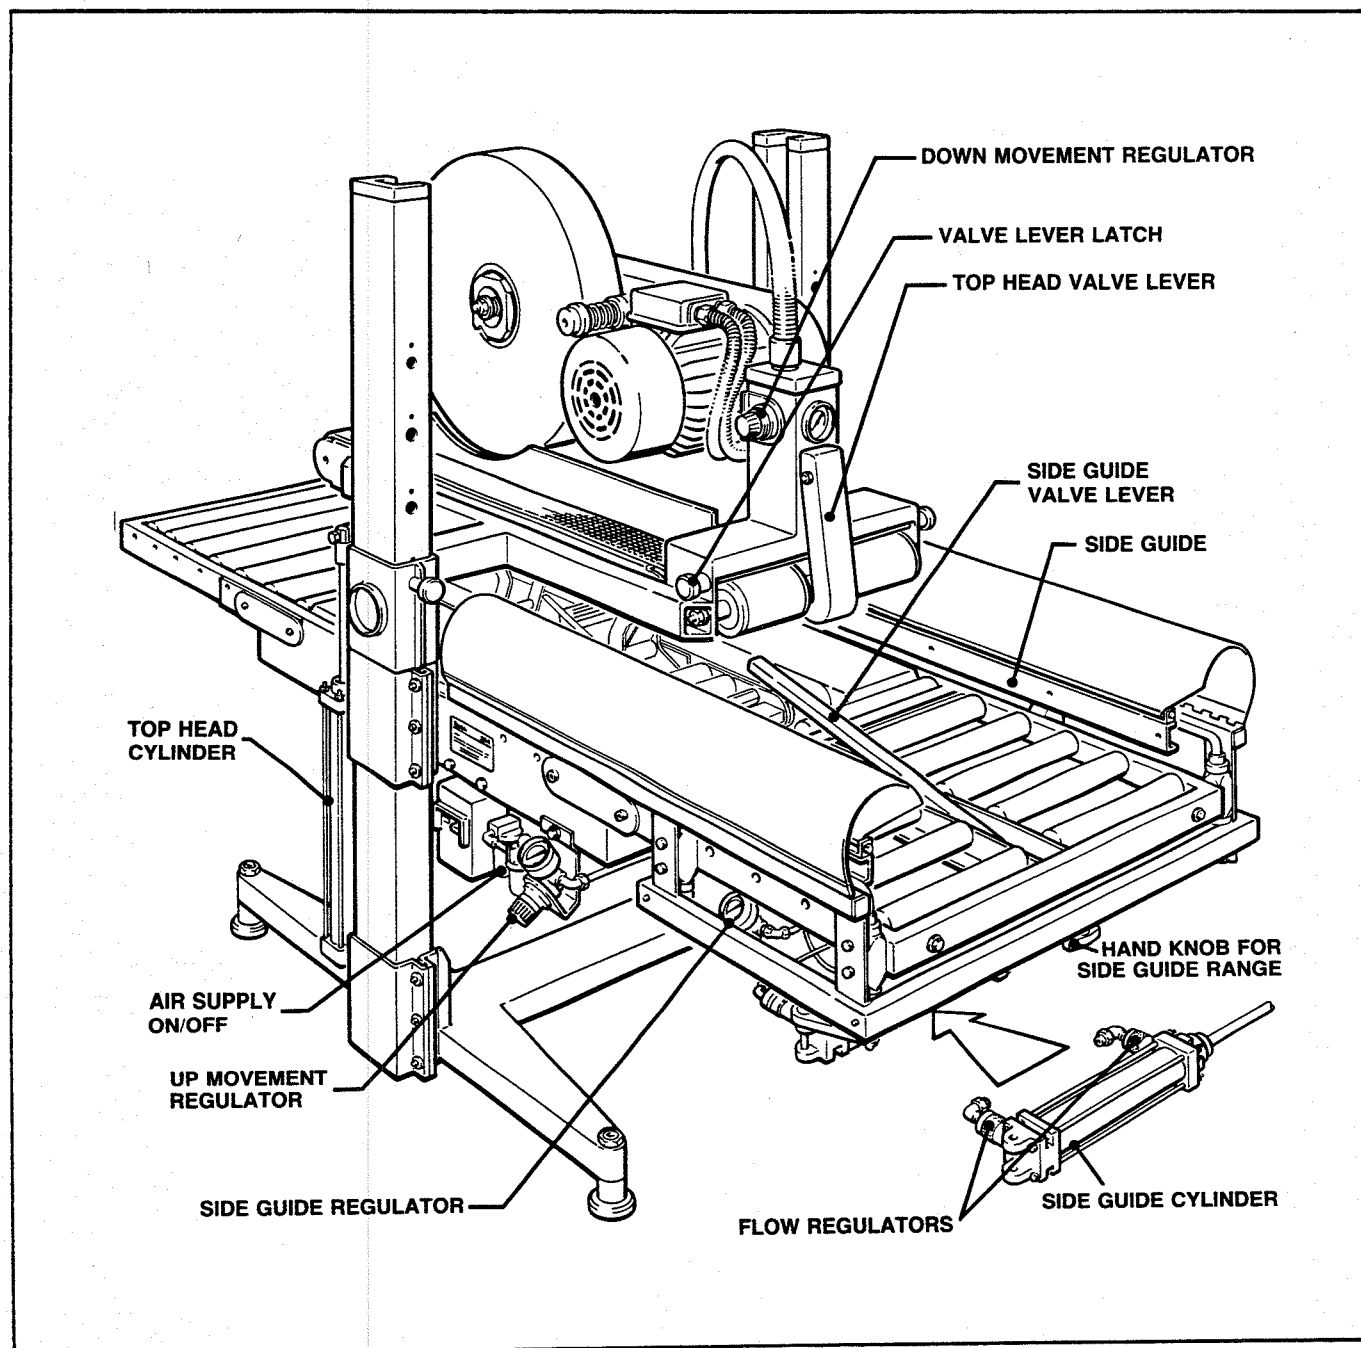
Set-Up Instructions - Case Sealer Components - Left Front View
